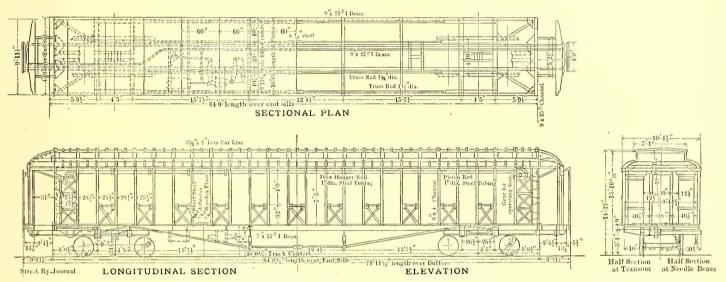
DETAILS OF STEEL-FRAME, SIDE-DOOR PASSENGER CAR CONSTRUCTED BY THE ILLINOIS CENTRAL RAILROAD
